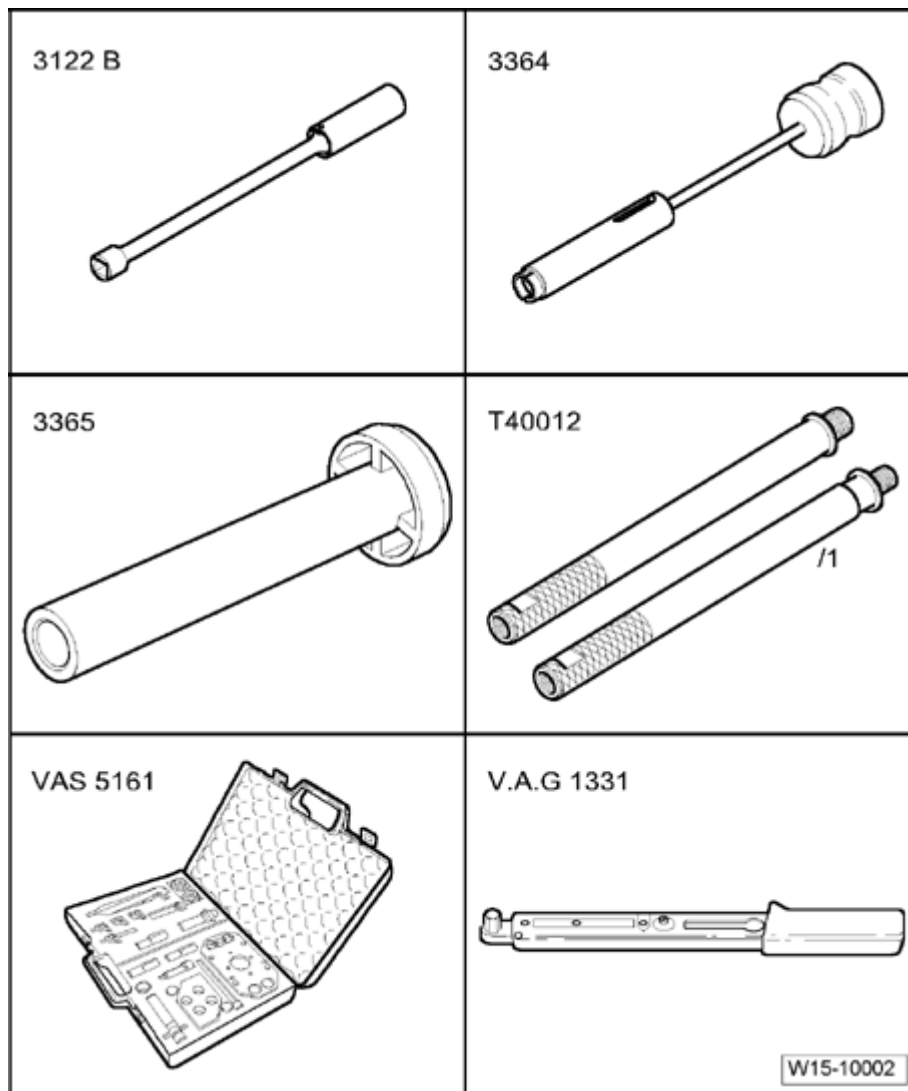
Identifying Special Tools - Valve Stem Seals, Replacing
